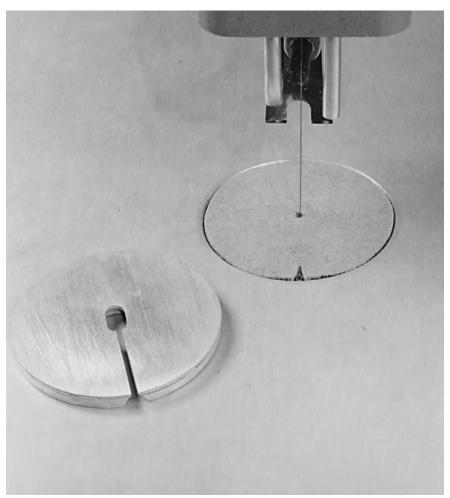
Make an auxiliary table insert out of hardboard to provide extra support for cutting small pieces or thin stock. A hole drilled in the center of the insert accommodates the blade.
